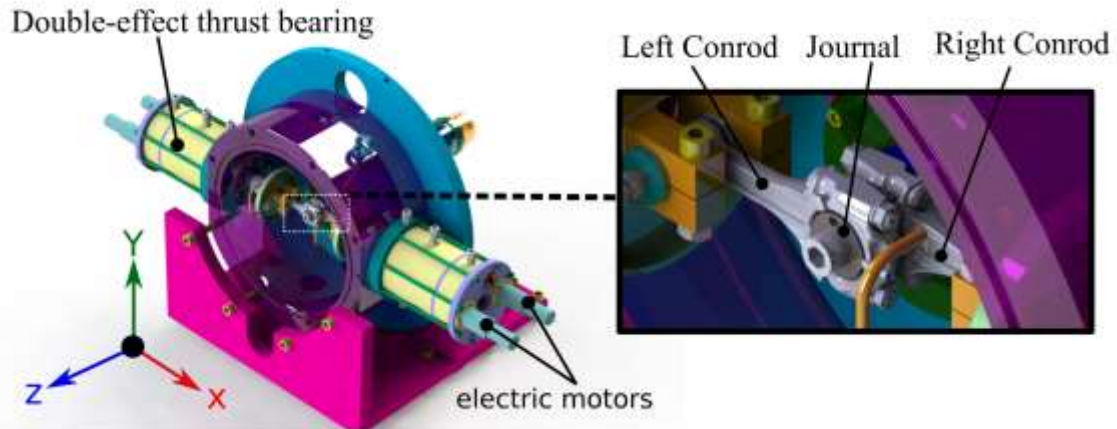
MEGAPASCALE isometric view and connecting rods location detail
